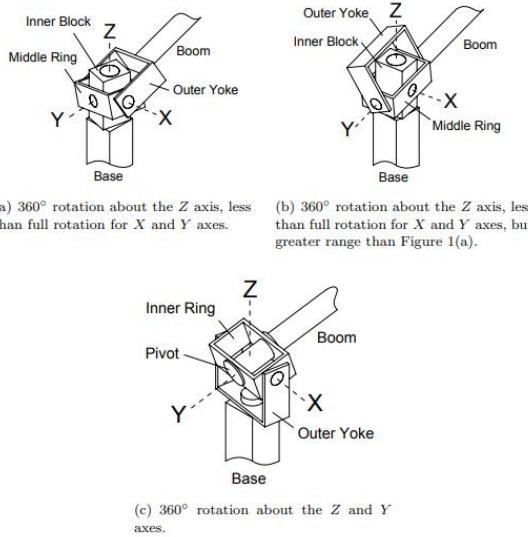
Shoulder joint with boom attached mounted to a base [2]
